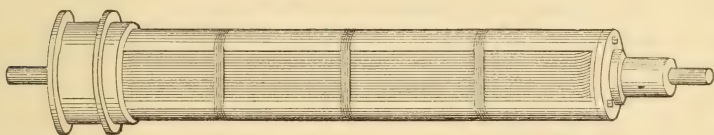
SIEMENS'S SPINDLE OR H ARMATURE.
